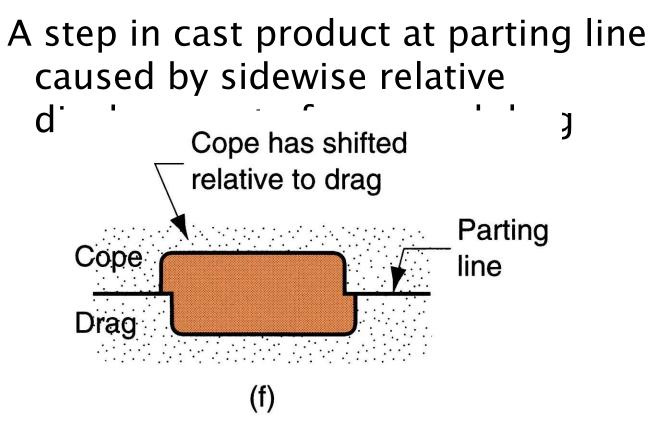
Common defects in sand castings: (f) mold shift
